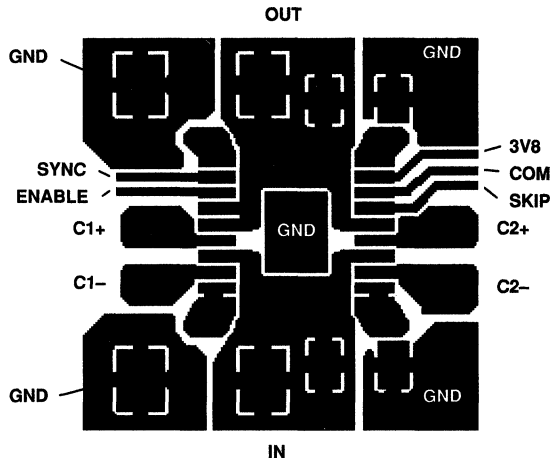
Recommended PCB Layout for TPS60100 (top view)
